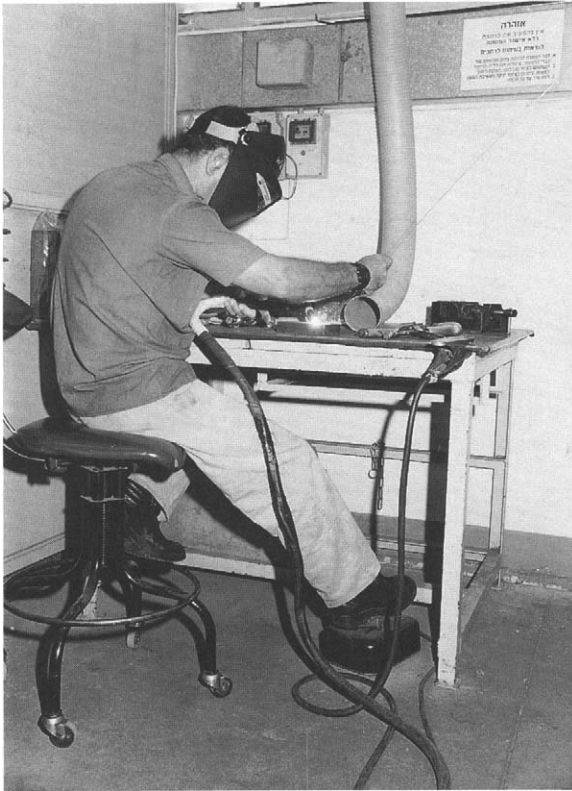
Tungsten-inert gas (TIG) welding in the welding shop: An example of a variety of chemical and physical hazards encountered in one job.
